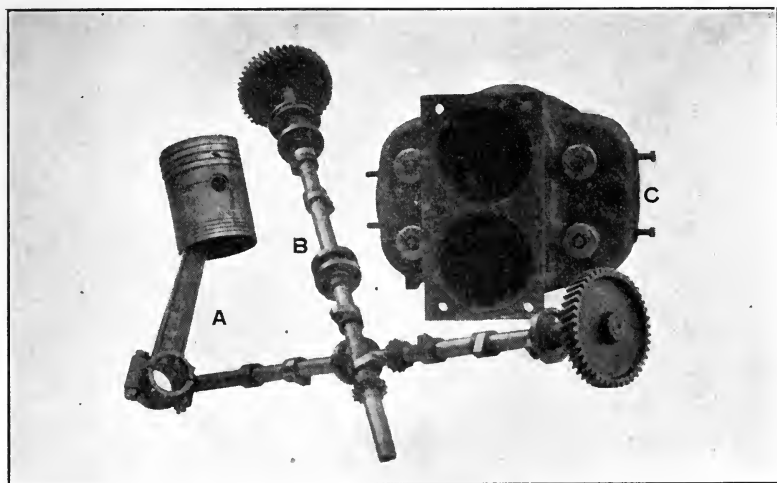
Some of the Components of Corbin " 40 " Motor. · A—Piston and Connecting Rod Assembly. B—Inlet and Exhaust Cam Shafts. C—Twin-Cylinder Casting.
